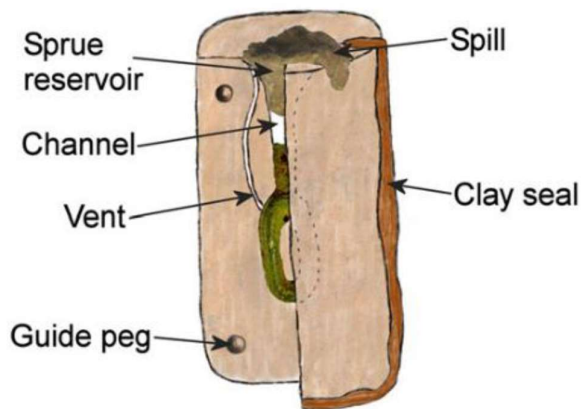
Illustration showing the mould terminology used in this paper; lost wax moulds would be a single piece of clay and would not need guiding pegs or clay seals. Illustration Copyright Eleanor Blakelock.
